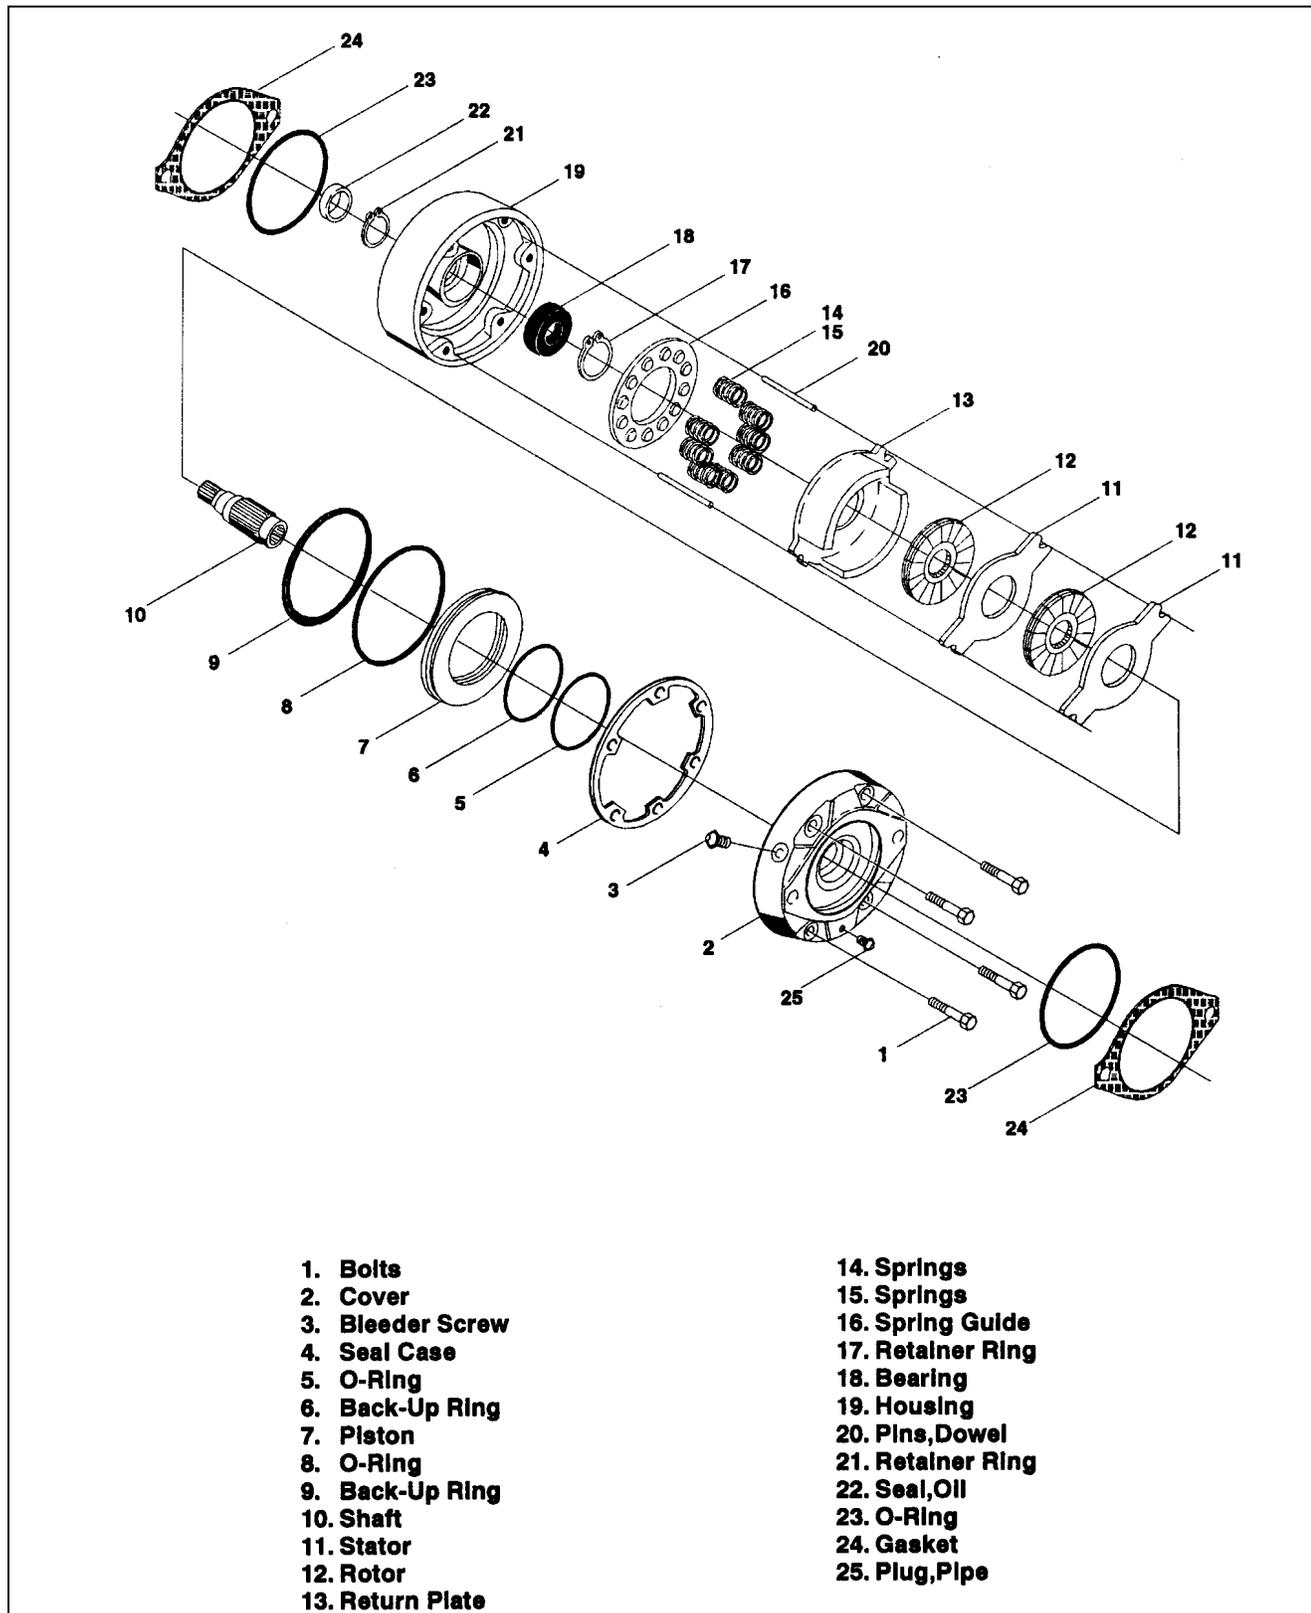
Swing Brake, Mico. (Machines Built From S/N 33476 to Present)
